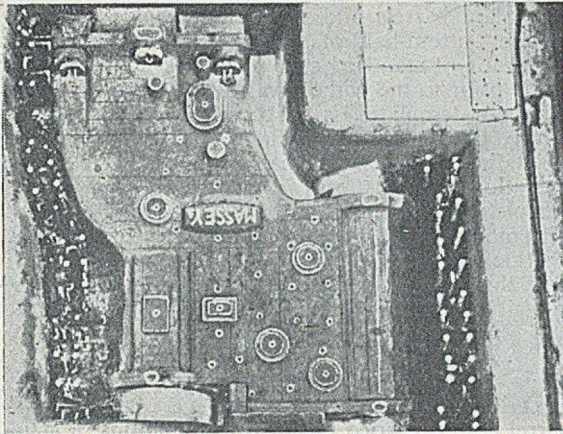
View from above of the Cylinder Mould, with Ramming continued to the Joint Face and Grids inserted for Lifting the Top-part.
